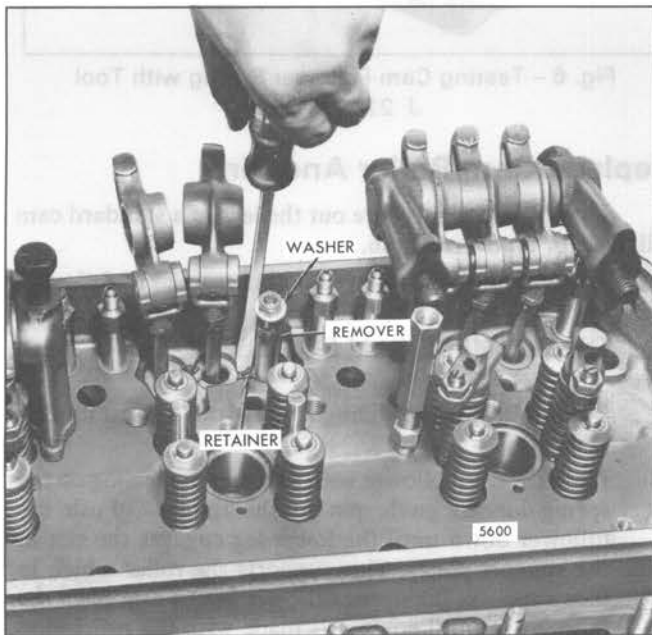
Removing Push Rod from Upper Side of Cylinder Head using Tool J 3092-01
